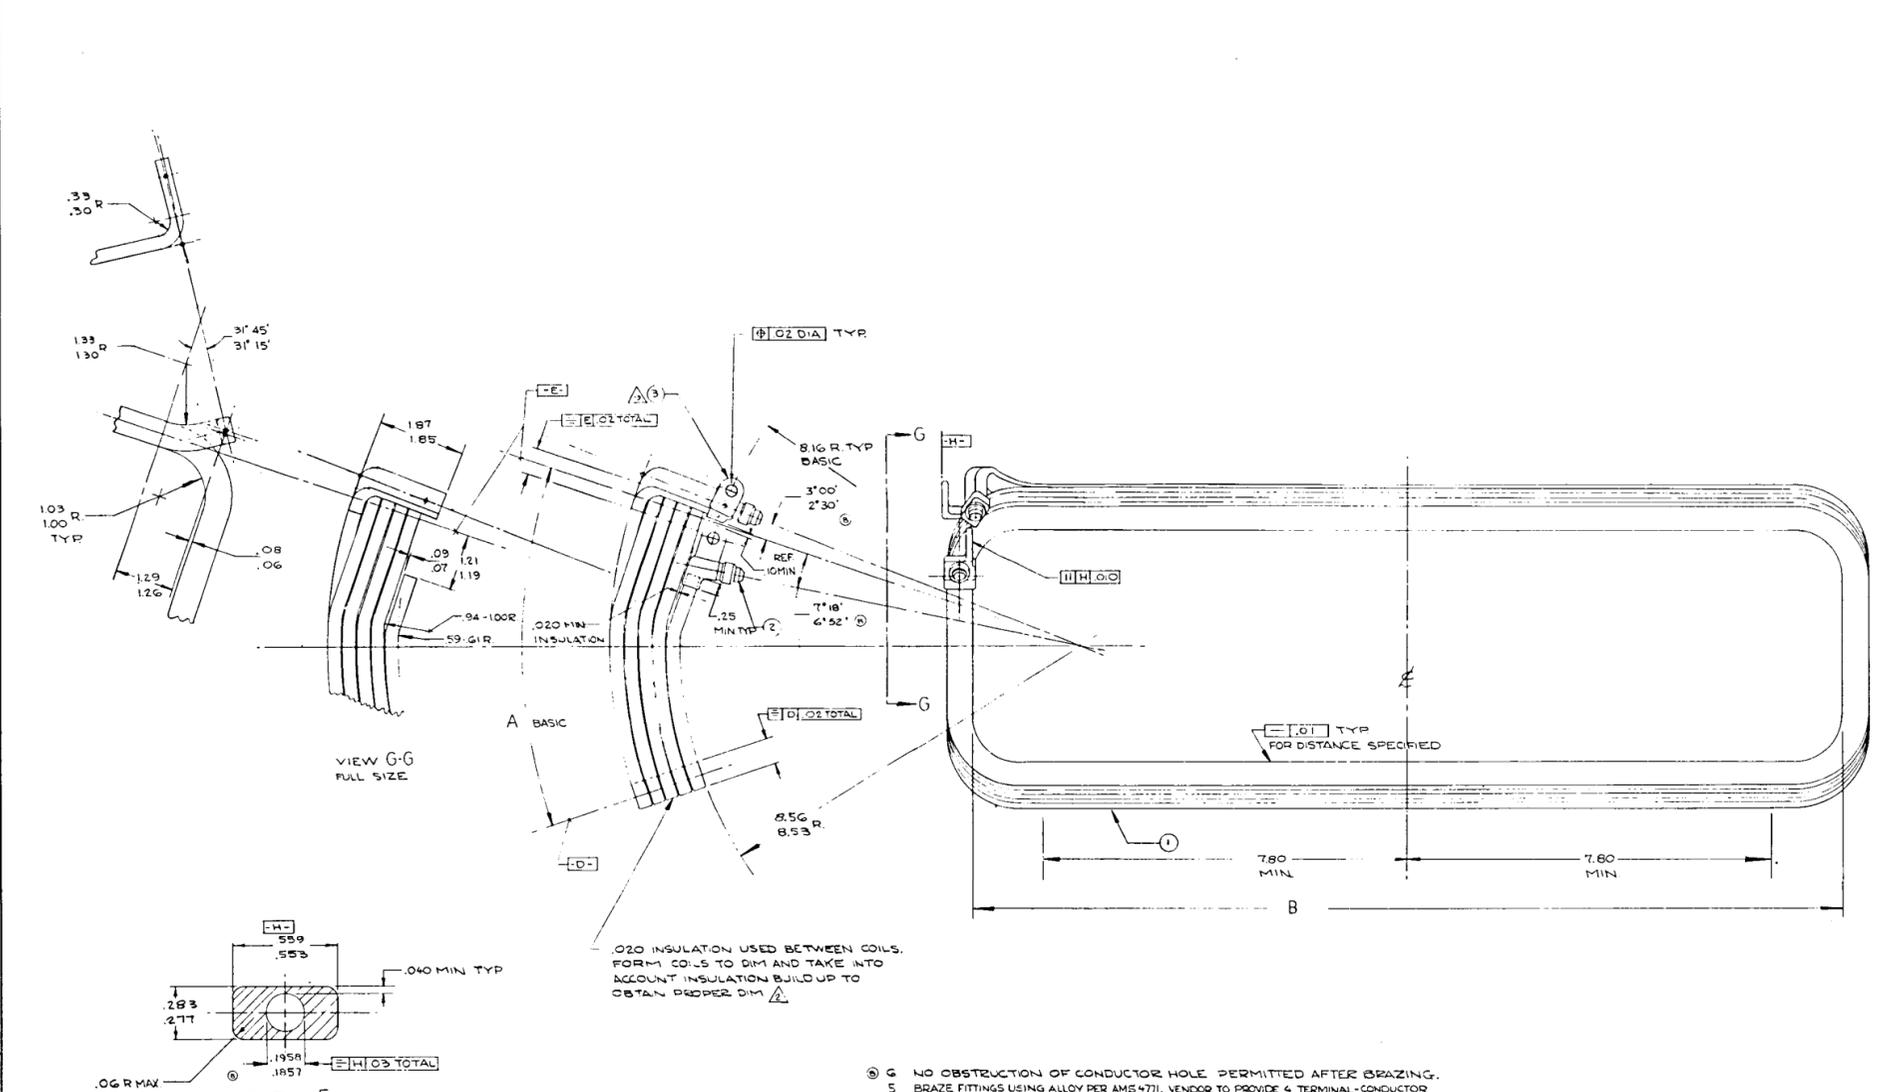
Assembly Drawing 2045166, Rotor Core Assembly (Page 1 of 2)
